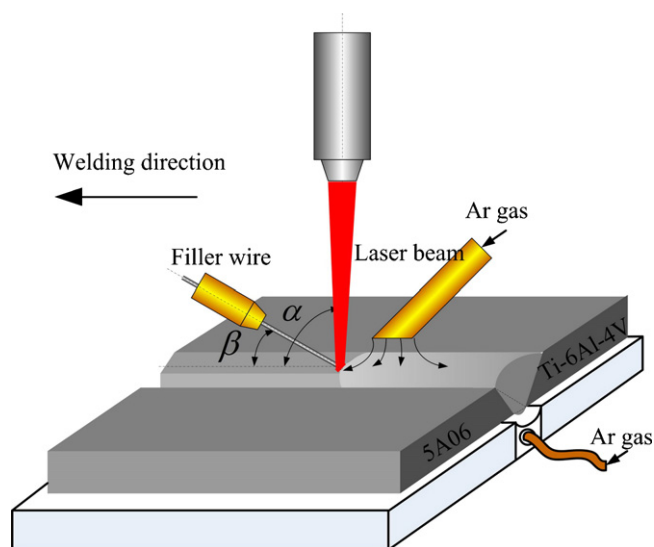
Schematic drawing of the laser welding–brazing processing.
